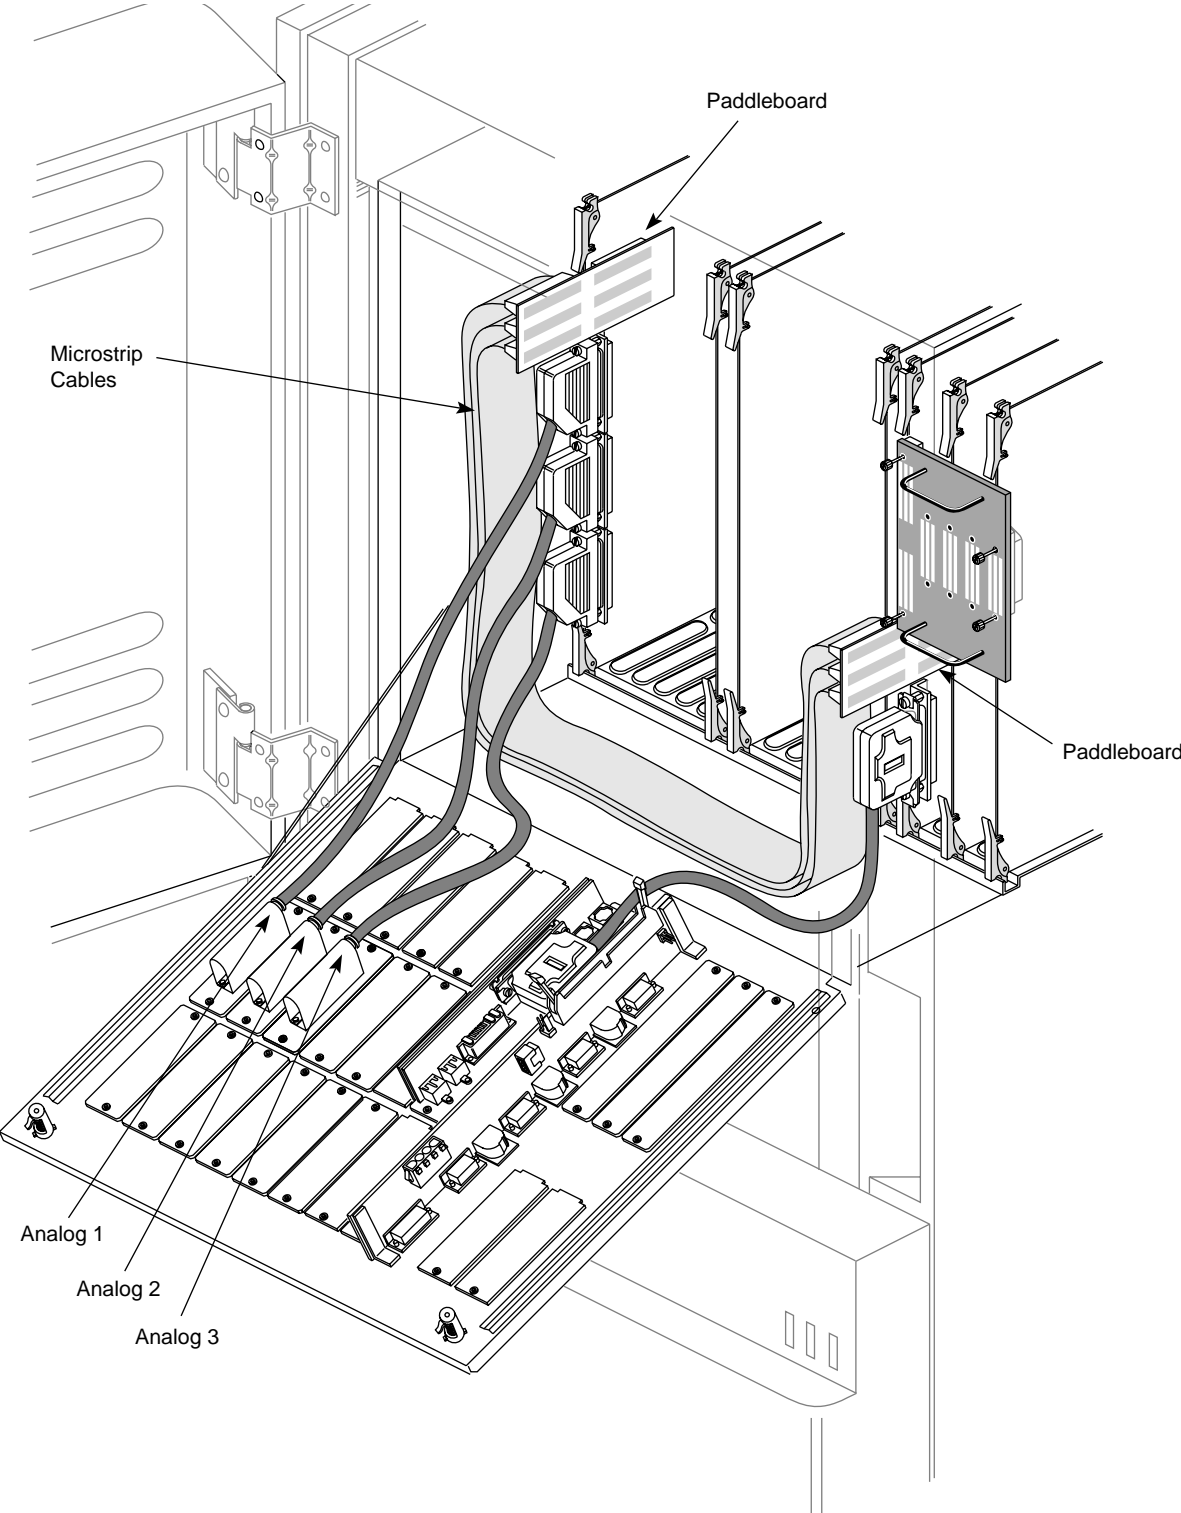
Complete Multi-Channel Option Installation for the POWER Series Chassis (Breakout Box Version)
